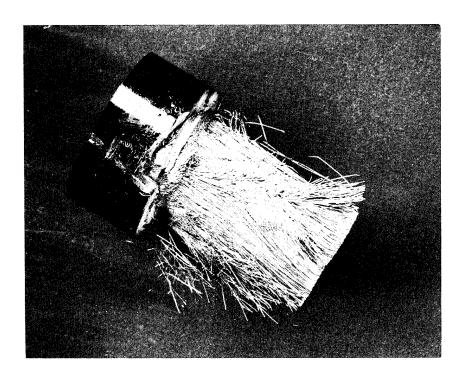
Tungsten A-Type Polyimide Plug Machined by Standard Techniques
